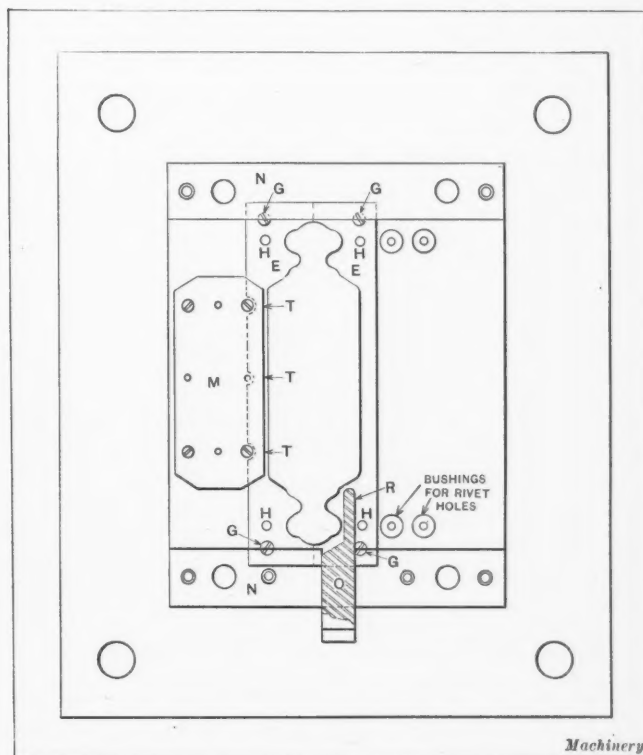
Plan of Progressive Blanking Die, showing Gages, Bushings, and Die Sections
